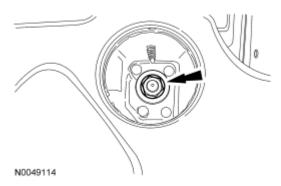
Engine Mount Nut Courtesy of FORD MOTOR CO.
